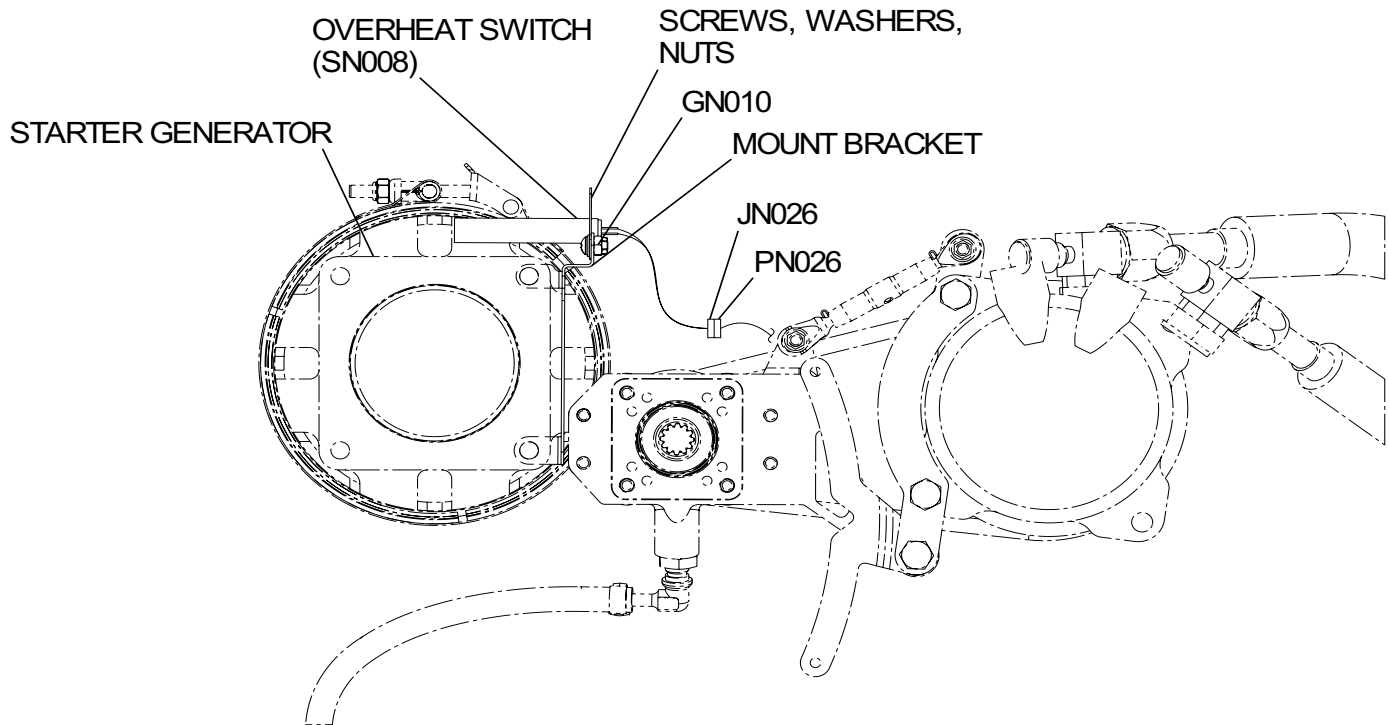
Sheet 2 : Overheat Switch Removal and Installation
